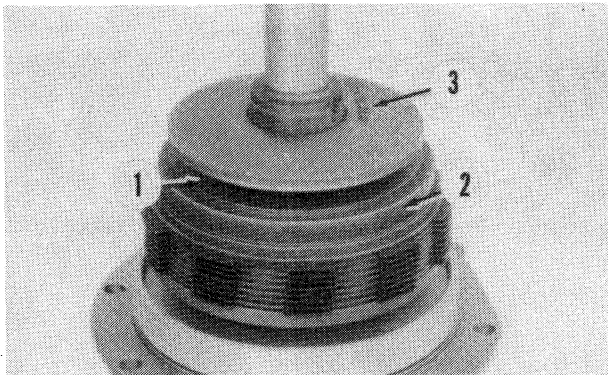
Install Belleville springs so outer diameter of first spring (1) is against pressure plate (2) and spring with measurement (3) is on top.
